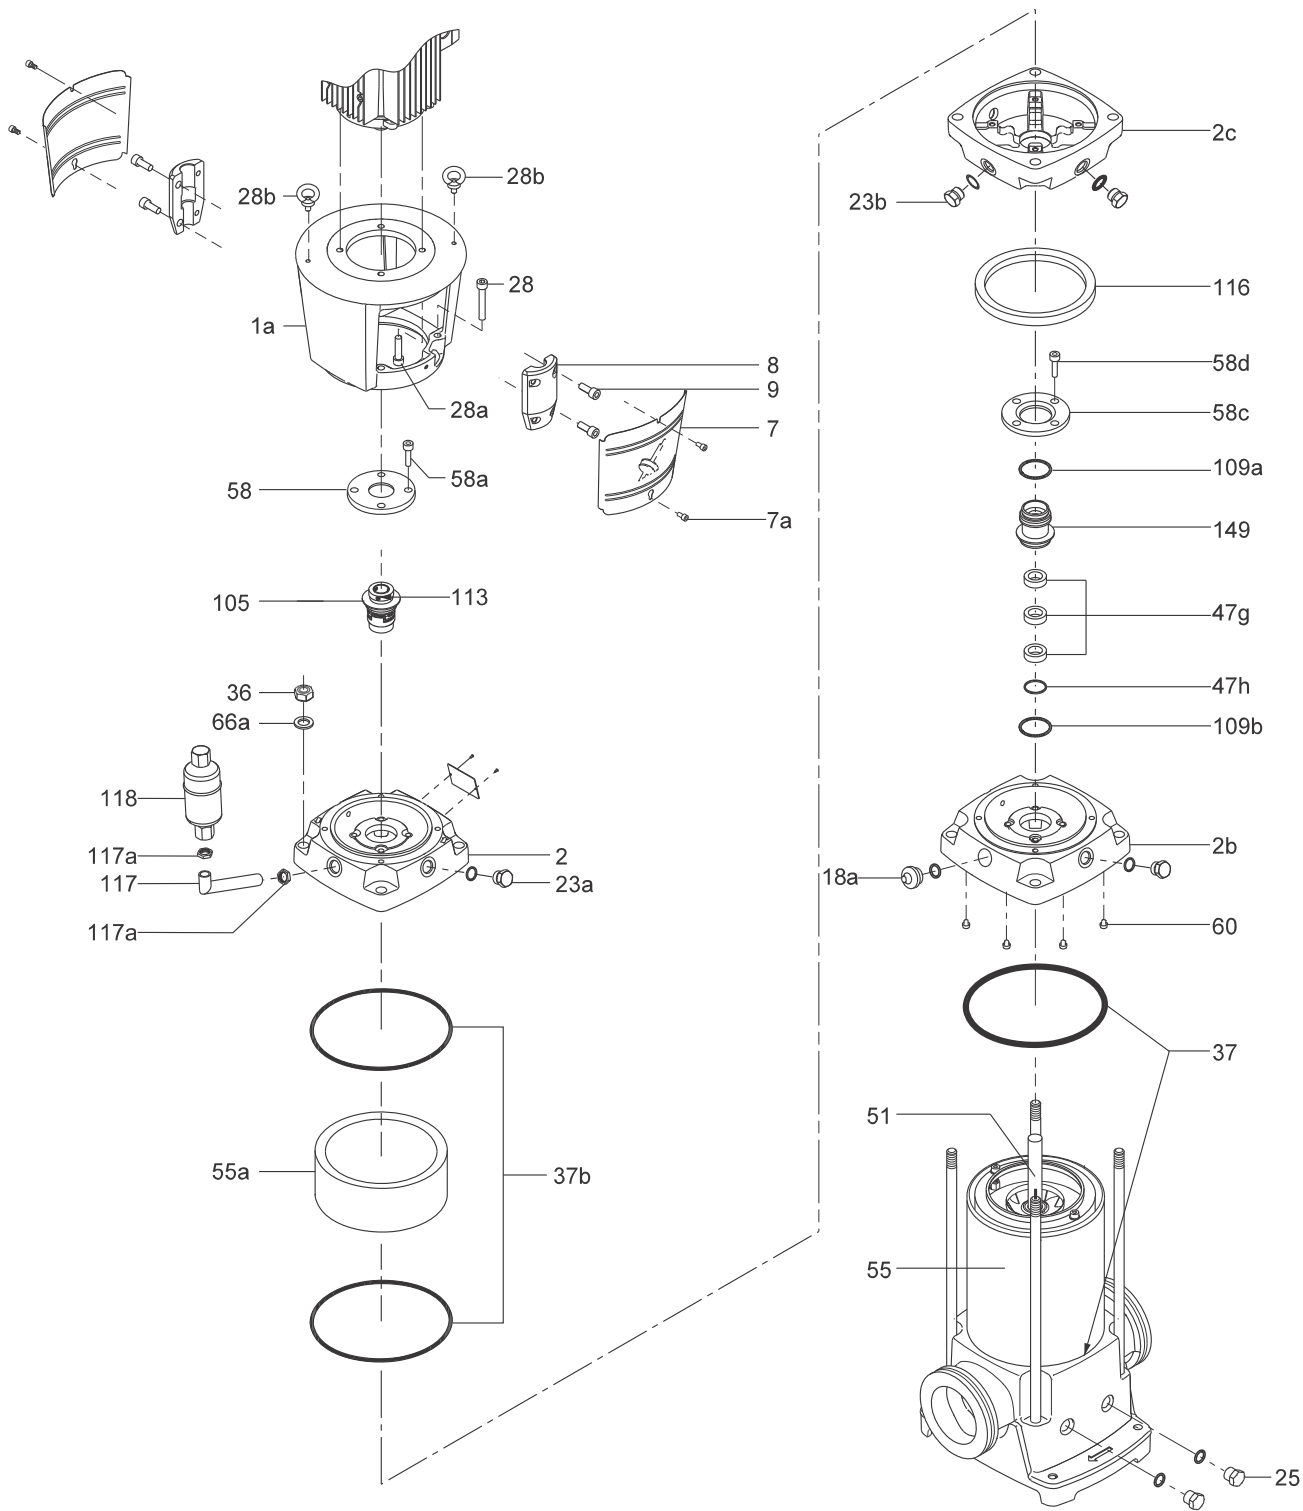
Exploded view, CR, CRN 32, 45, 64, 90
